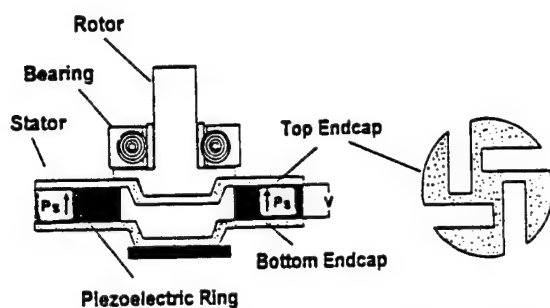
'Windmill' motor with a disk-shaped torsional coupler.
